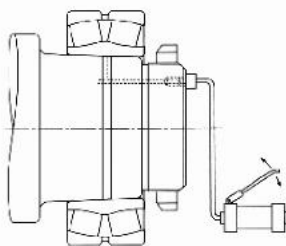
Removal Using Oil Injection Hydraulic Pump
